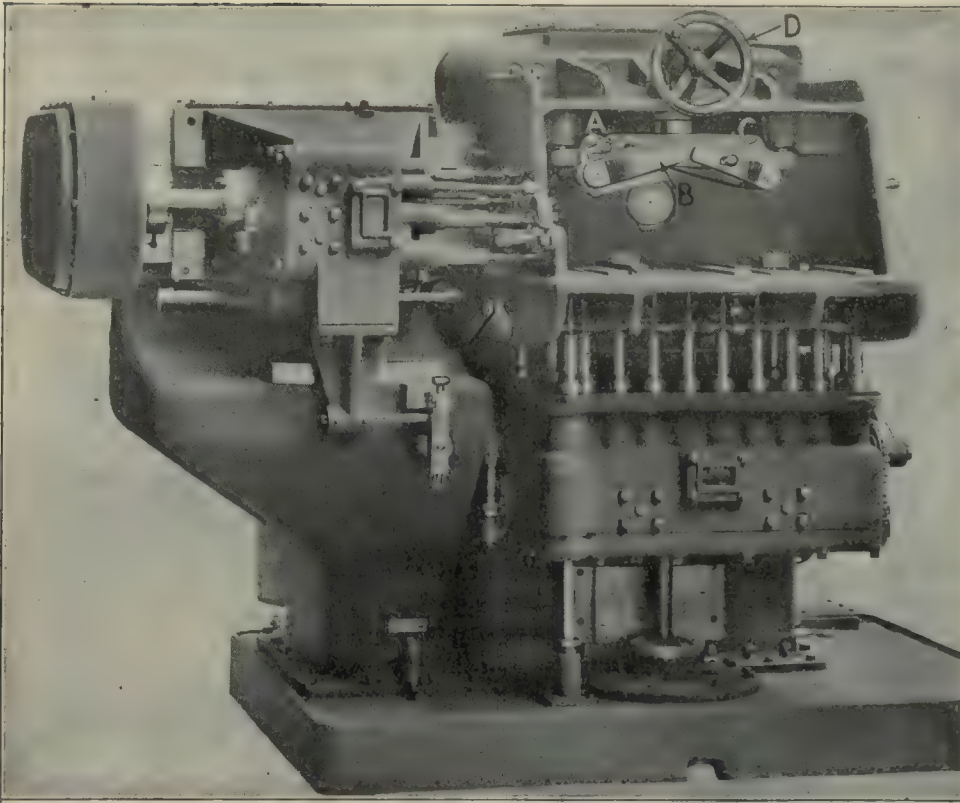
TWO-WAY DRILLING MACHINE FOR CRANKCASE OF TRACTOR ENGINE
